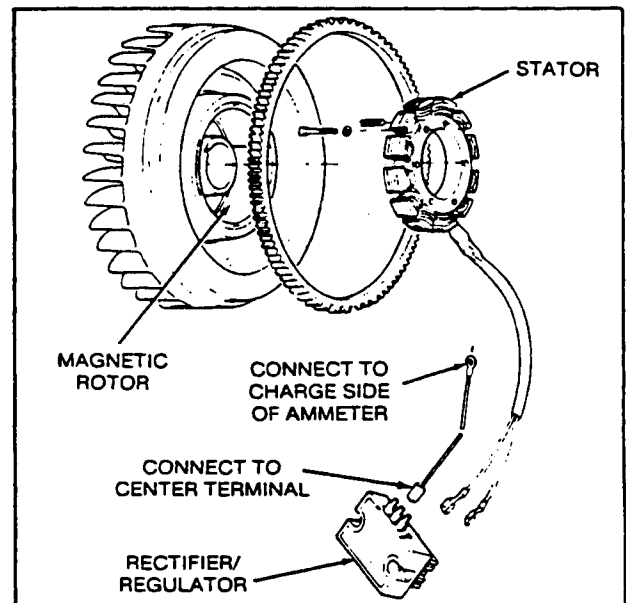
A 30 AMP FLYWHEEL ALTERNATOR
